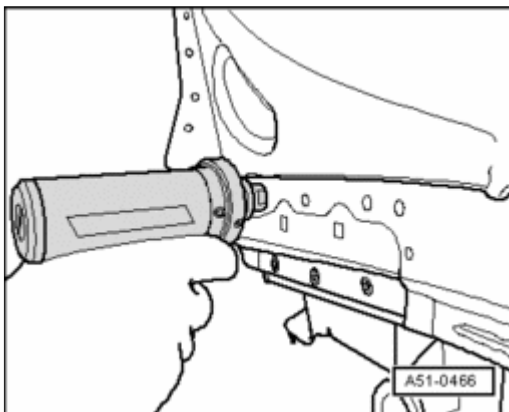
Welding 4 mm Bolts With VAS 5196/1
